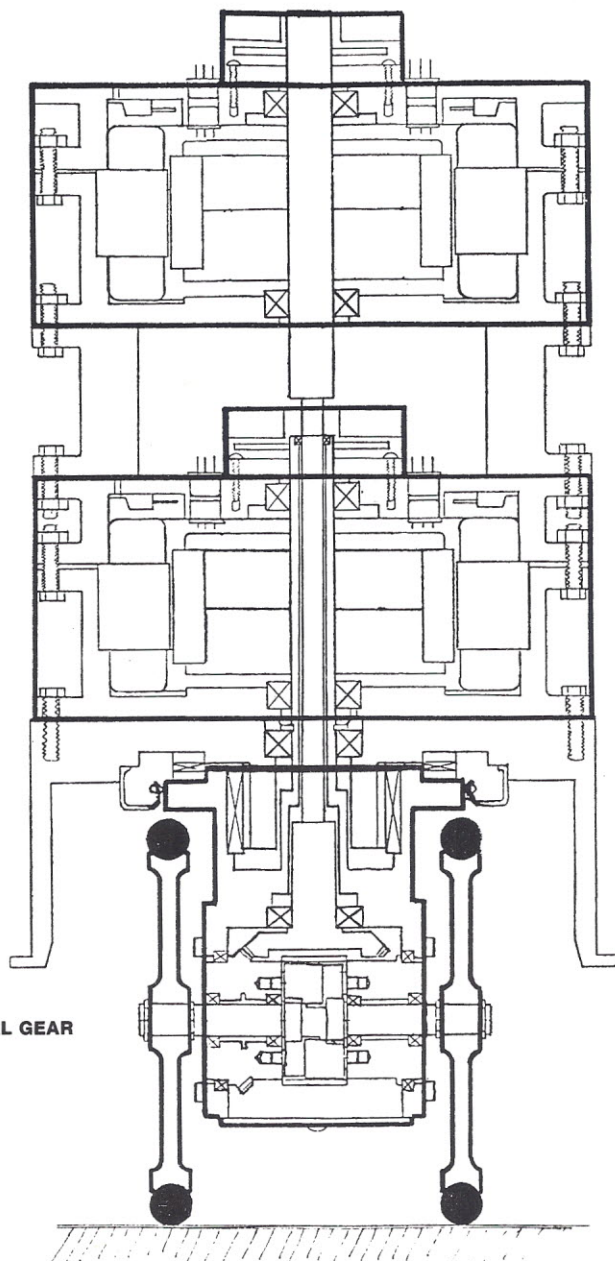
A drawing showing some of the detail of Pluto's wheel assemblies. (Drawing courtesy The Robotics Institute, Carnegie-Mellon University.)
